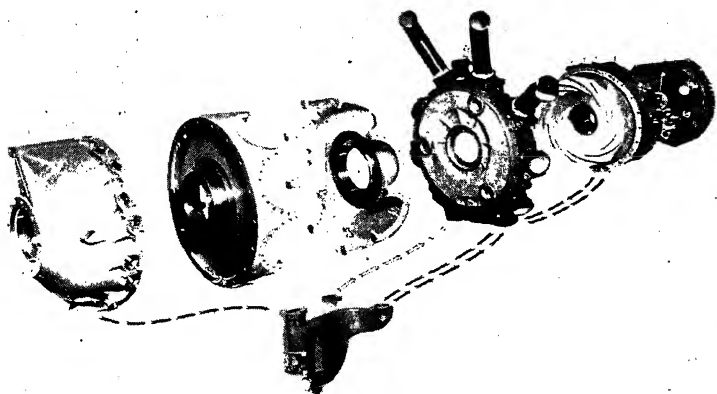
Exploded view of Wright cyclone G-200 engine crankcase sections showing details of the steel main section.
